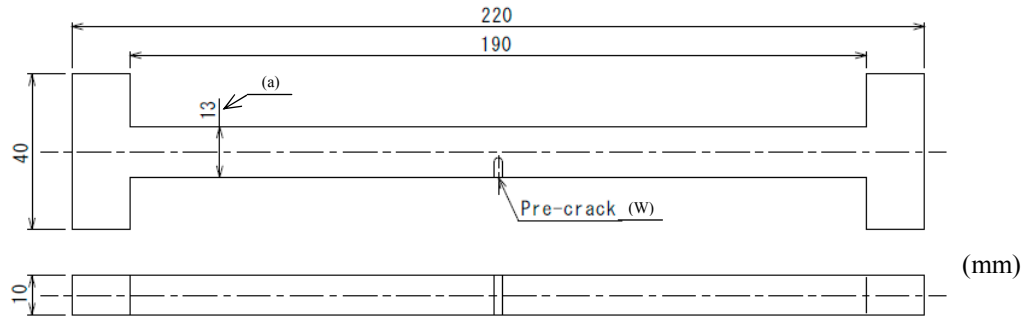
Geometry of the tensile test specimen ($a/W=0.5$).
